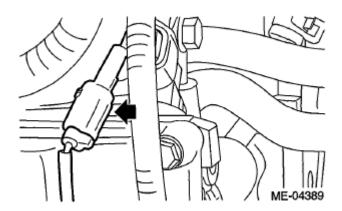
Locating Oil Level Switch Connector Courtesy of SUBARU OF AMERICA, INC.
